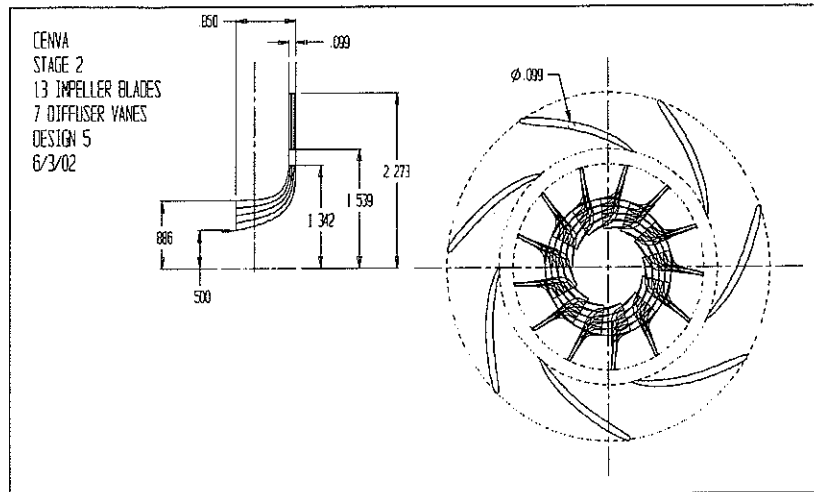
CFD Design of Second Stage Impeller and Diffuser
